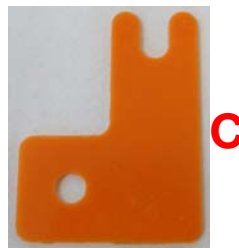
14. 0.030 Shim for Magnetic Dial Wheel Installation, Part # 29-1300
